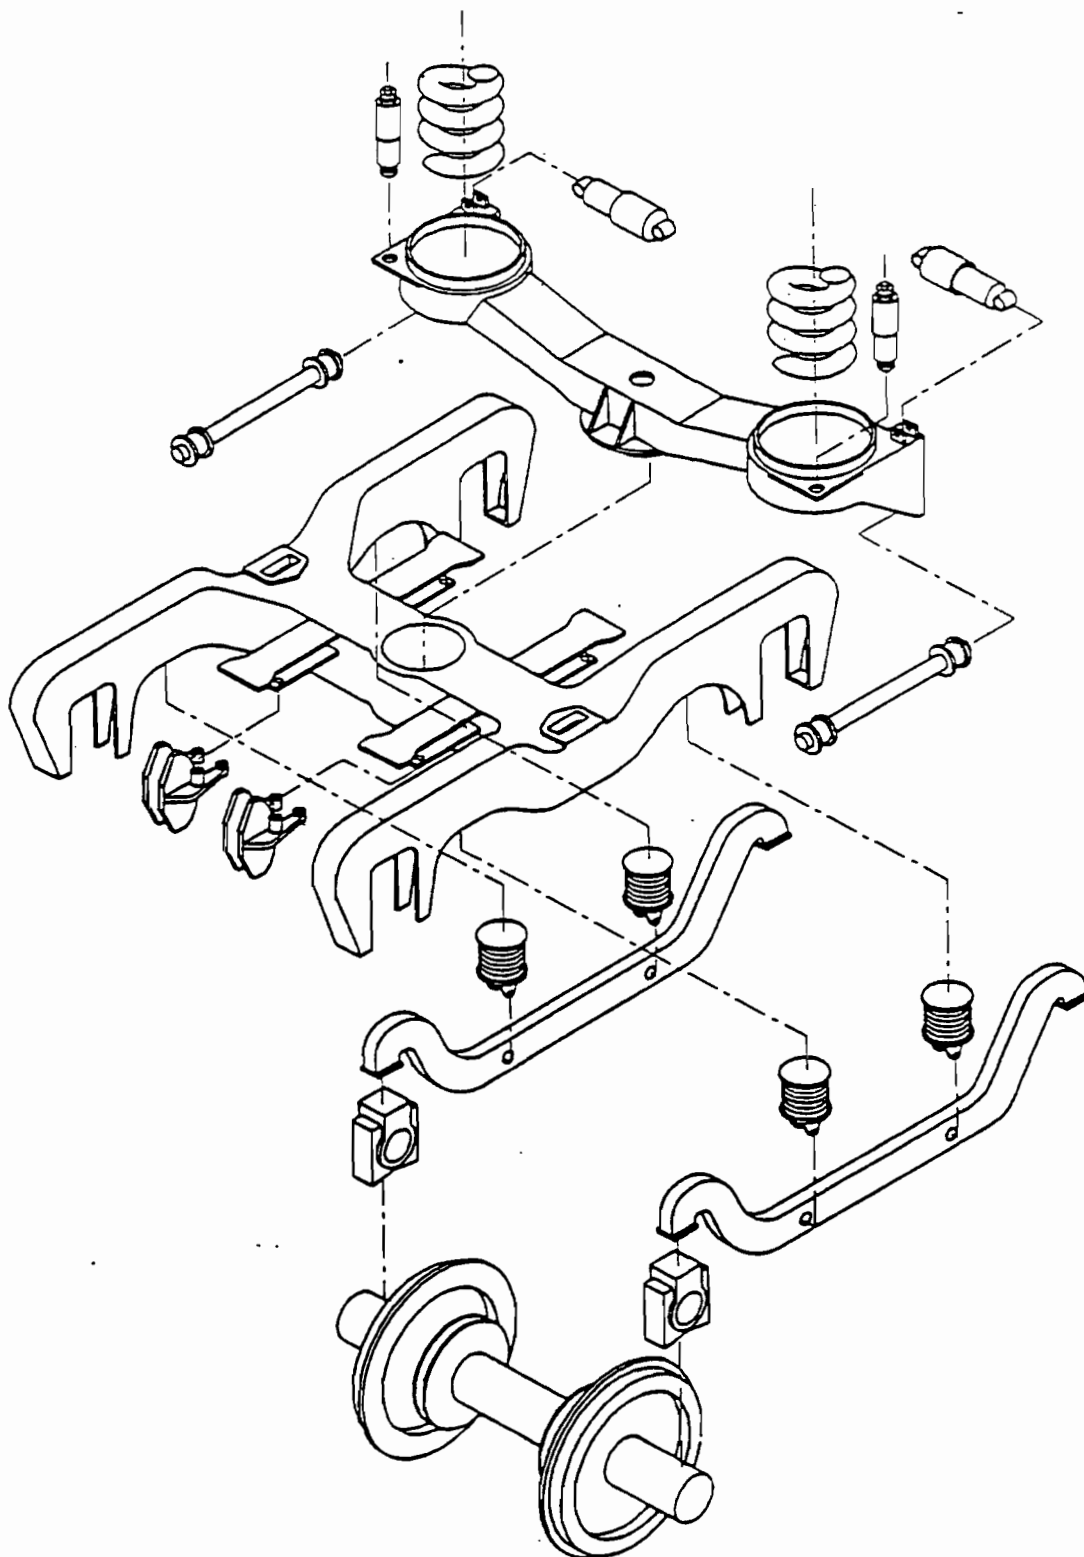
GSI Truck for Amtrak Superliner II - Exploded View
